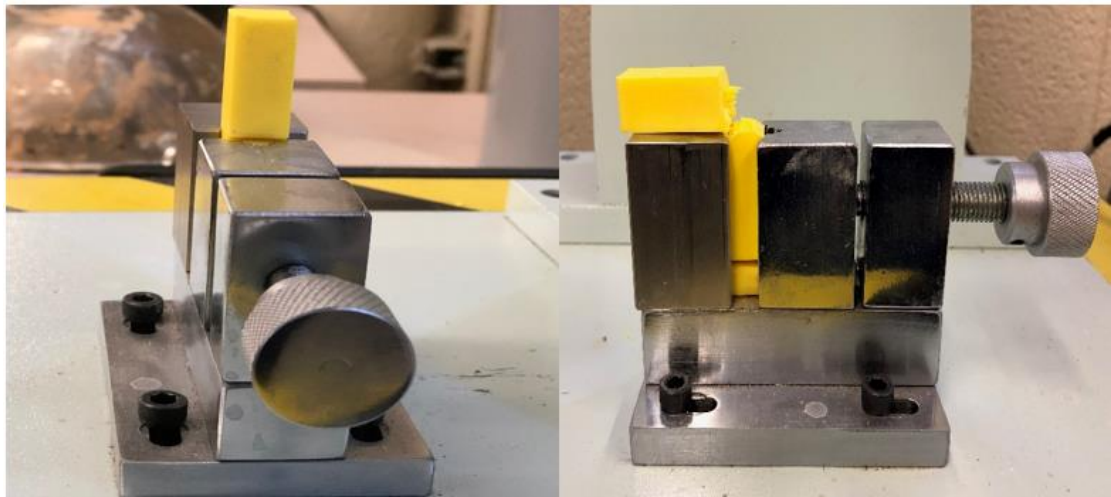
Arrangement of impact specimen between the vices (left) and a hinge failure (right) of specimen
